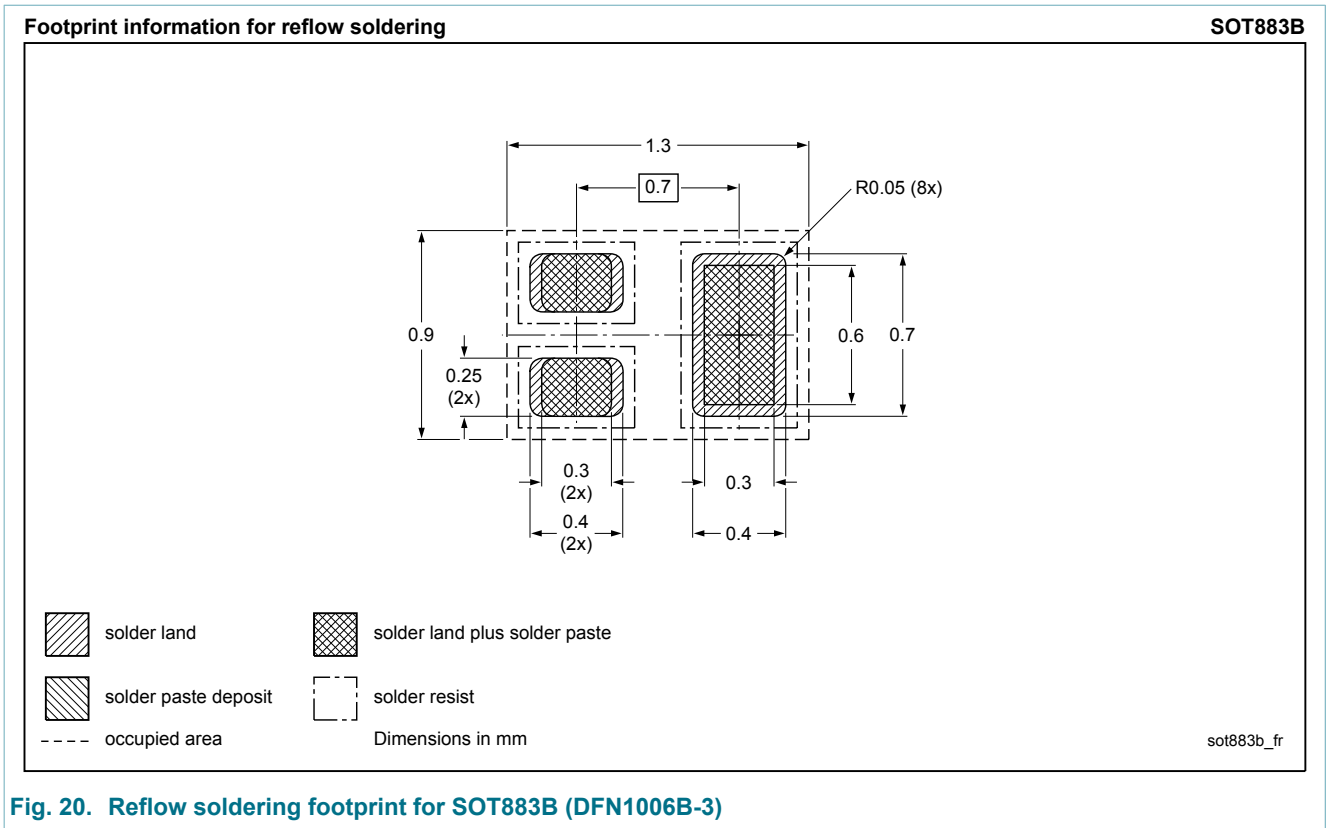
Reflow soldering footprint for SOT883B (DFN1006B-3)
